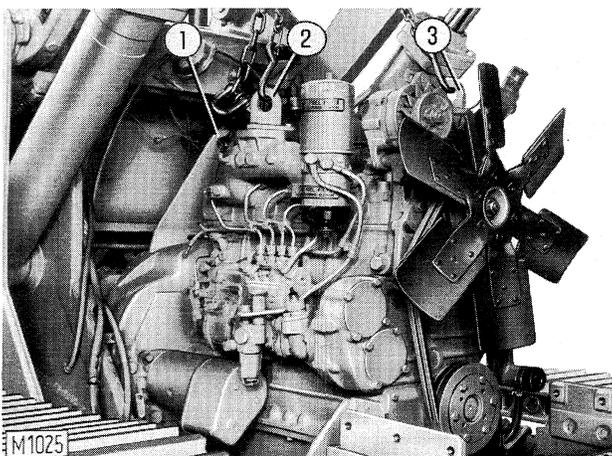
Removal (installation) of engine using lift hook 290740.
